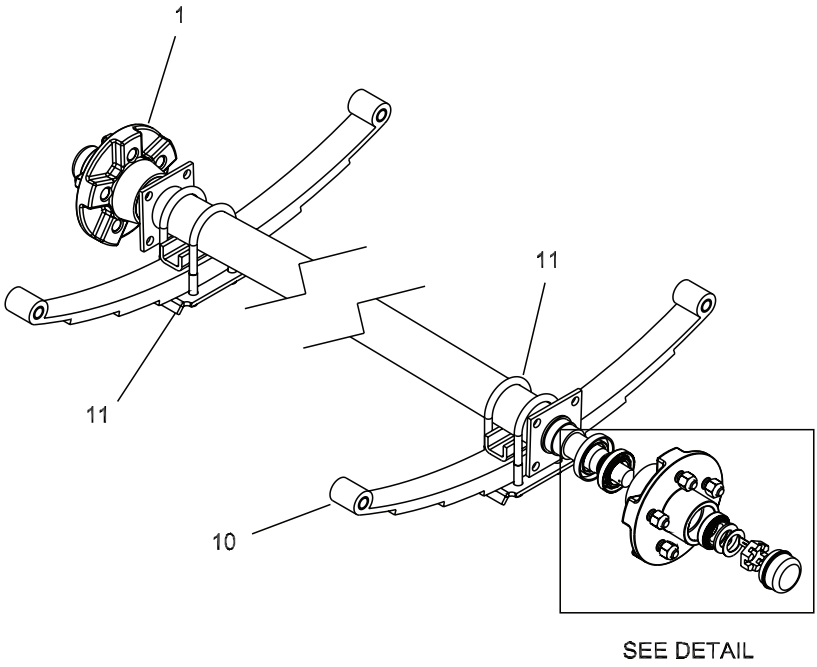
AXLE ASSEMBLY, 3500LB IDLER
